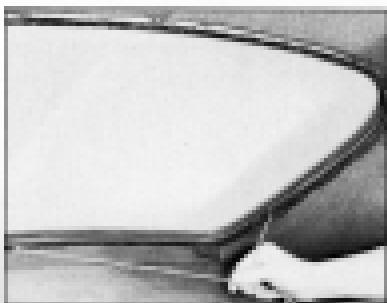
Rolling Inner Lip of Rubber Channel Over Pinch Weld
